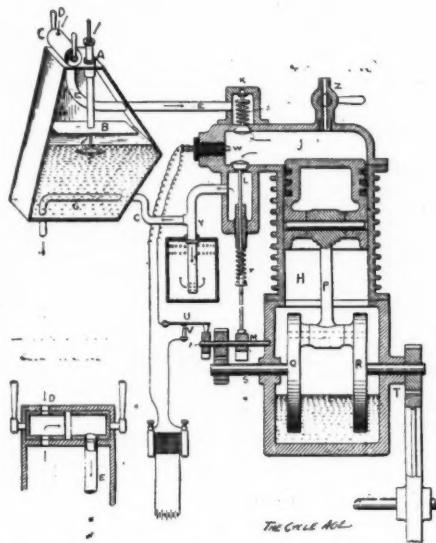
Mechanism of a Small Gasolene Engine with a Carburetor Operating on the Evaporation Principle.
